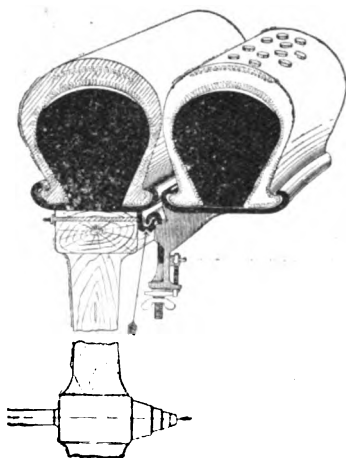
Sectional View of Wheel with new Flange and Stepney Non-Skid Spare Wheel.
